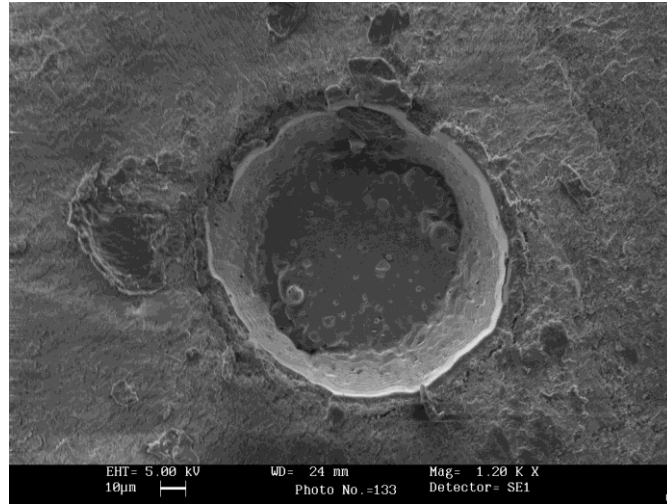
Excimer laser machined circular hole machined into AlN, 1080 pulses, attenuator setting 0.7.
